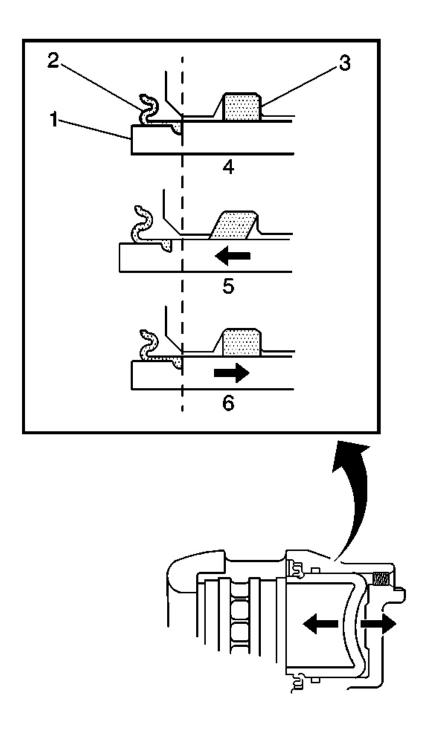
Identifying Brake Caliper/Pad Inspection Areas Courtesy of GENERAL MOTORS CORP.
